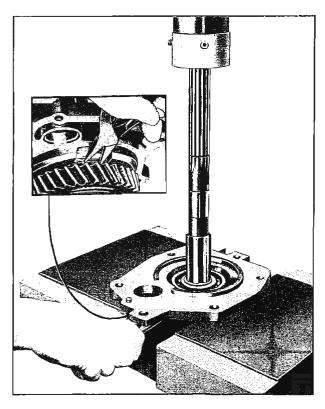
A-21 Removal of Mainshaft from Rear Bearing Retainer
